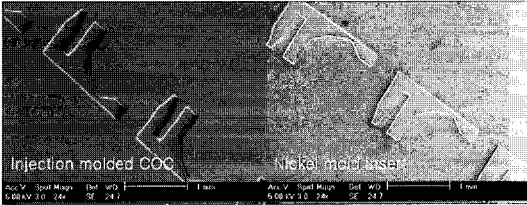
F-shape SEM images of injection molded COC and nickel mold insert
